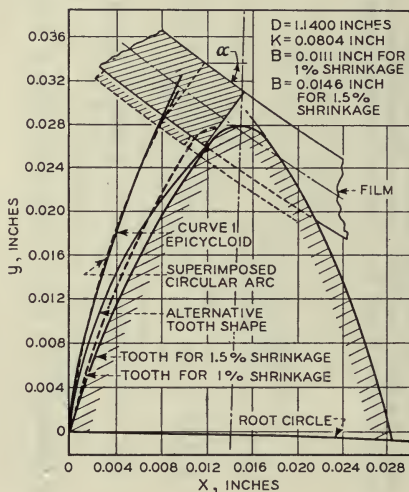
Tooth Shape for 12-Tooth, 16-mm Sprocket.
